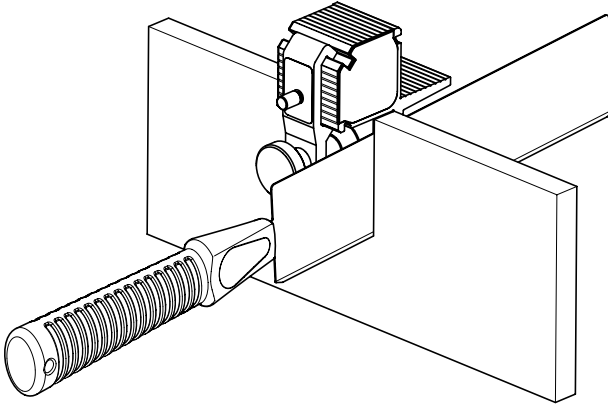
Cutting beyond the guide, the saw kerf should maintain a straight cut.
